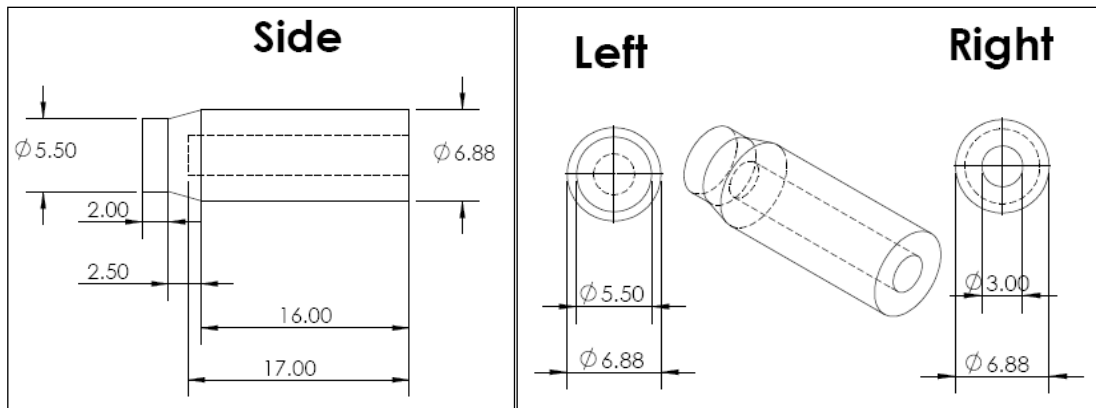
A 2-D sketch of AISI 4137 Steel Workpiece
